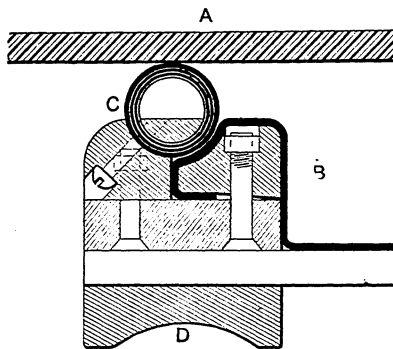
Section Showing Joint Between Edge of Tank and Hull.
